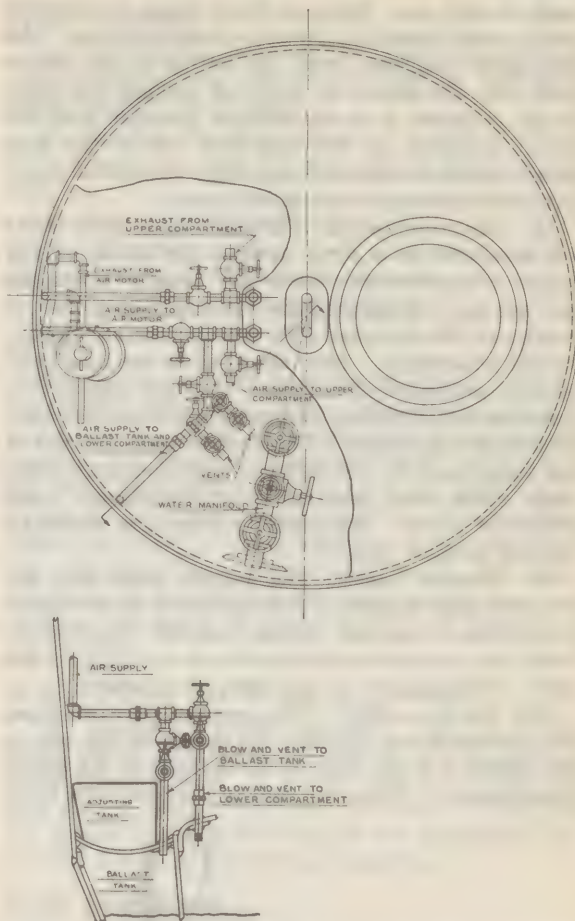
Rescue chamber. Typical plan view and sectional view of blow and vent manifold.
